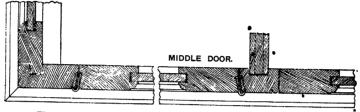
Horizontal Section through Front of Dresser Cupboard.
